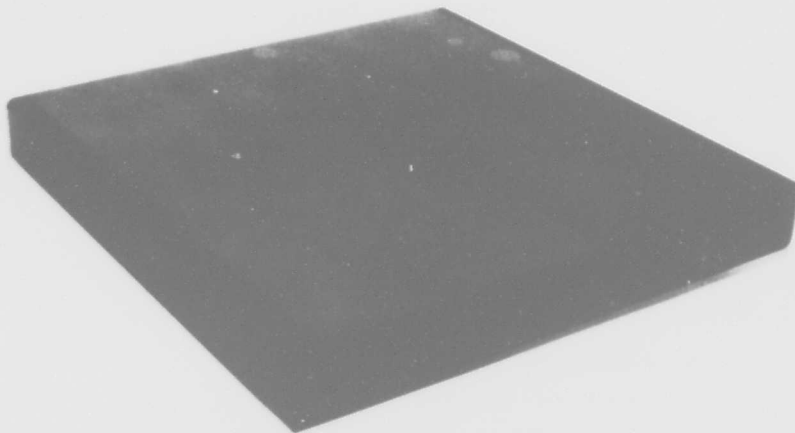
CFRP Component ($270 \times 270 \times 35 \text{mm}^3$) Manufactured in a Near-Net-Shape Technique
